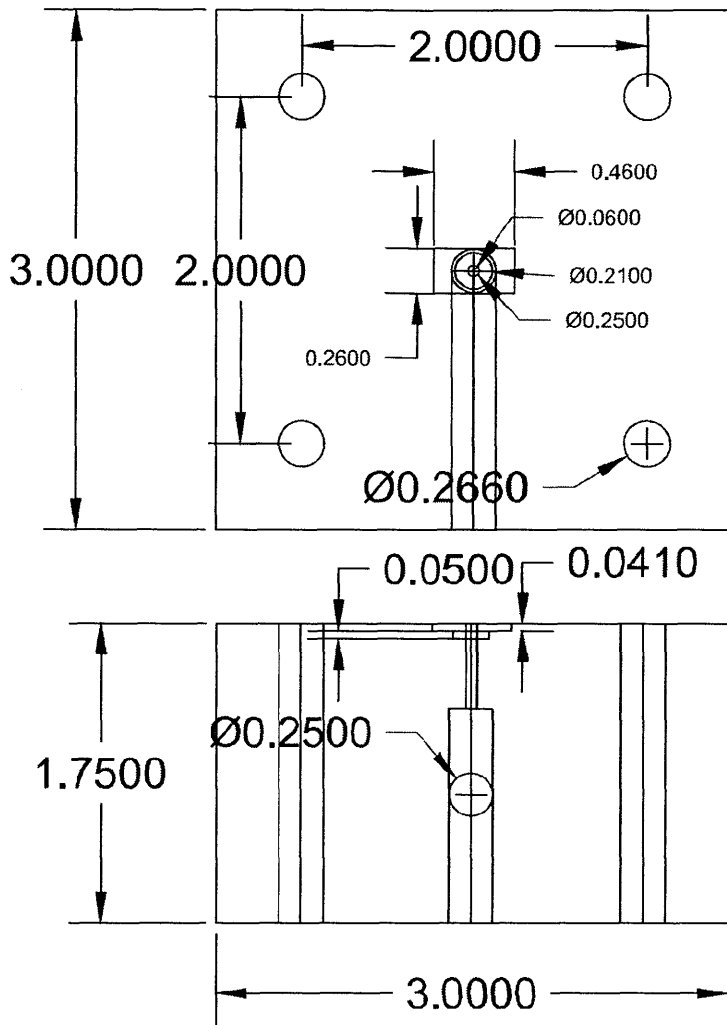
Diagrams showing aluminum base for test jig, a top view on top and a side view on bottom. Dimensions are given in inches.
